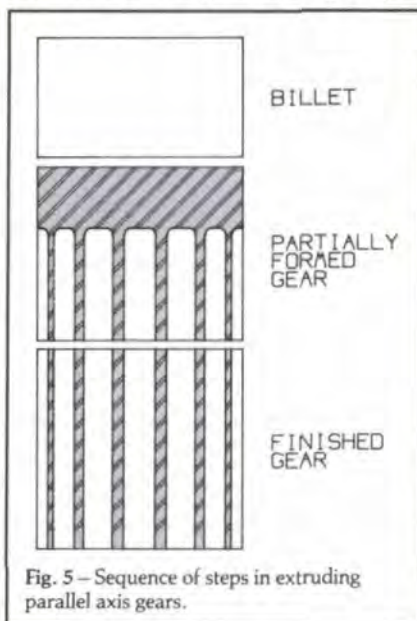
Sequence of steps in extruding parallel axis gears.
